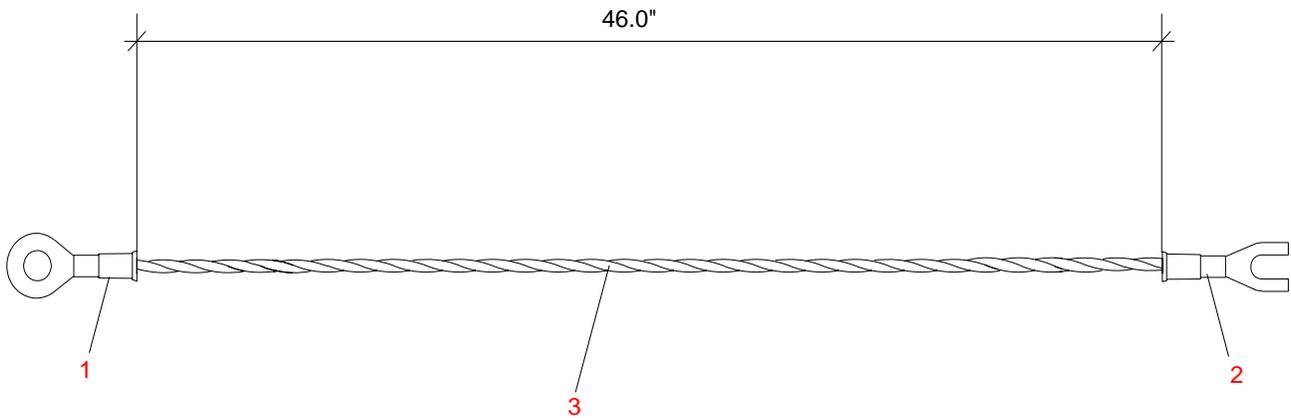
Positive Wire - Driver Board MCB Side Cable Assembly
